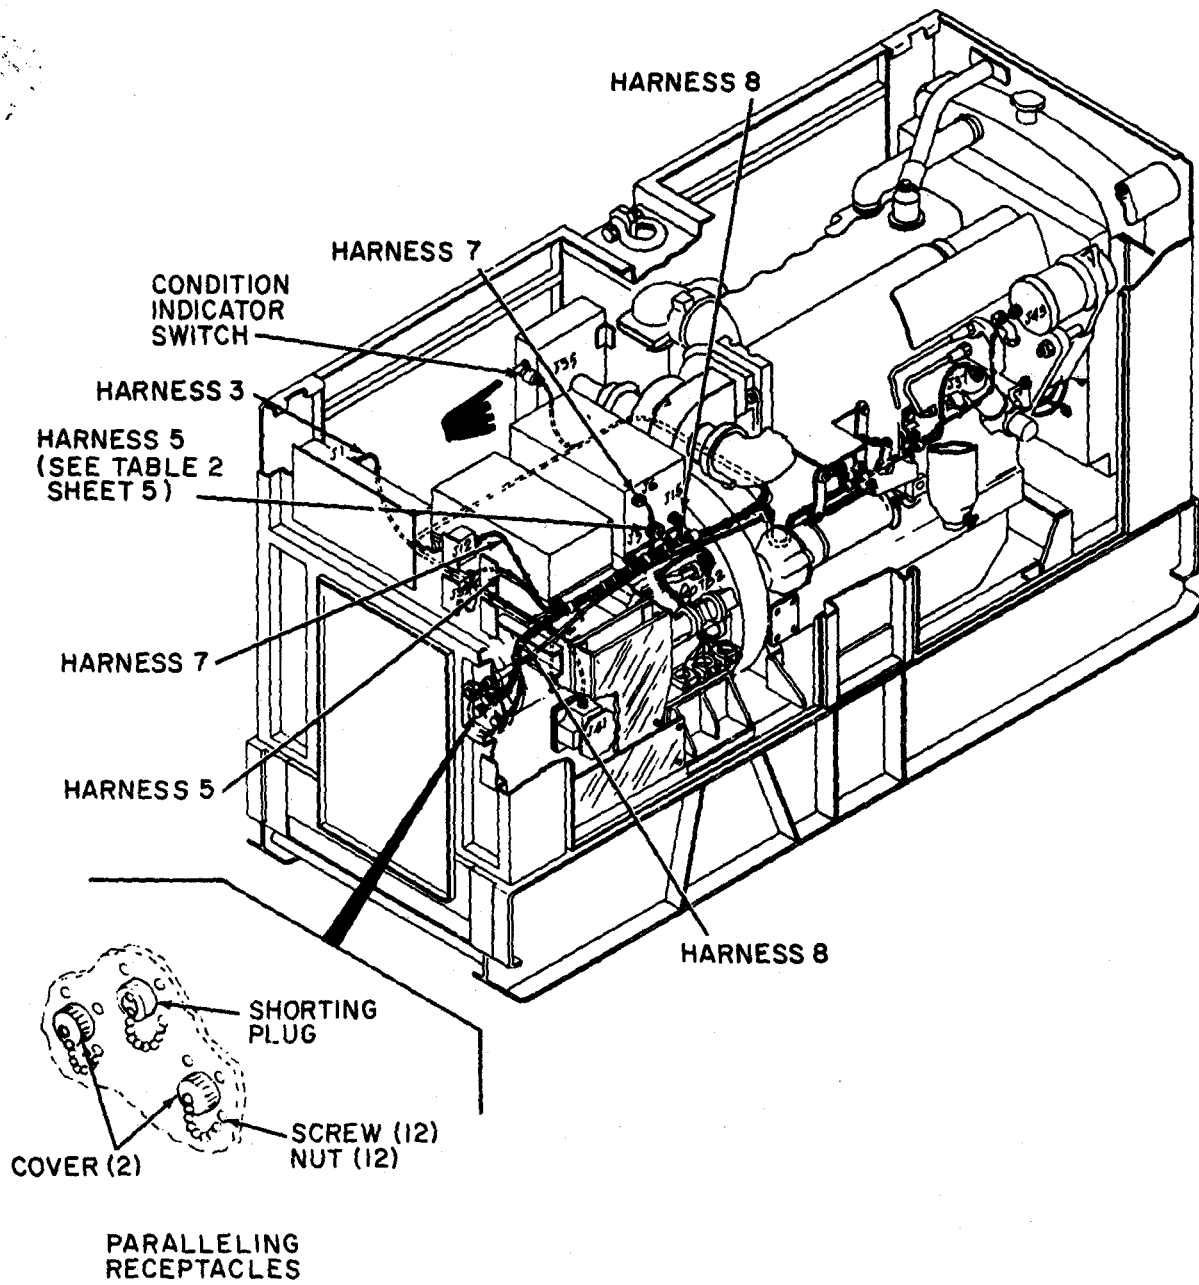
Wiring harnesses 50/60 hertz generator sets, removal and installation
